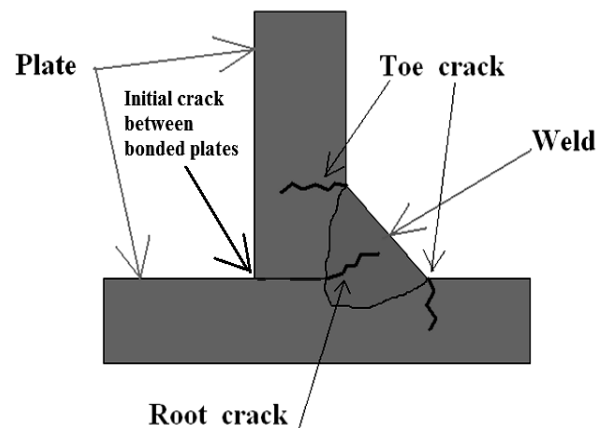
Fatigue fracture modes in a fillet weld.
